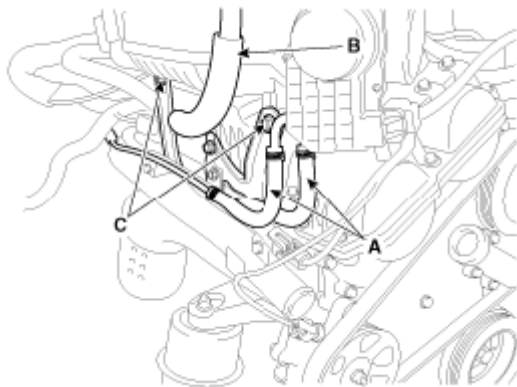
Identifying Throttle Body Coolant Hoses, Breather Hose, & Surge Tank Stay Bolts
